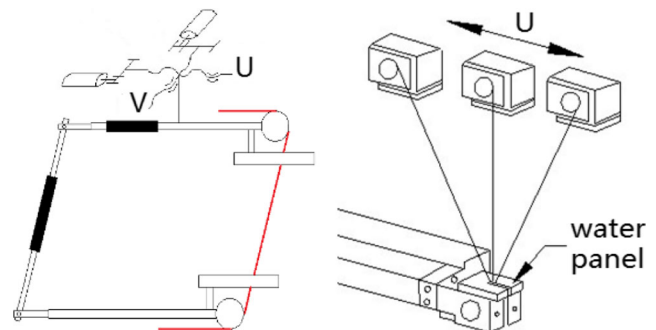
Traditional four-bar linkage swinging wire frame of large taper wire electrical discharge machine (WEDM)
